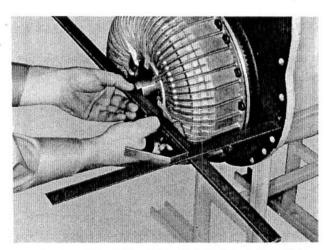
MEASURING IMPELLER HUB DISTANCE FROM REAR FACE OF ENGINE BLOCK
